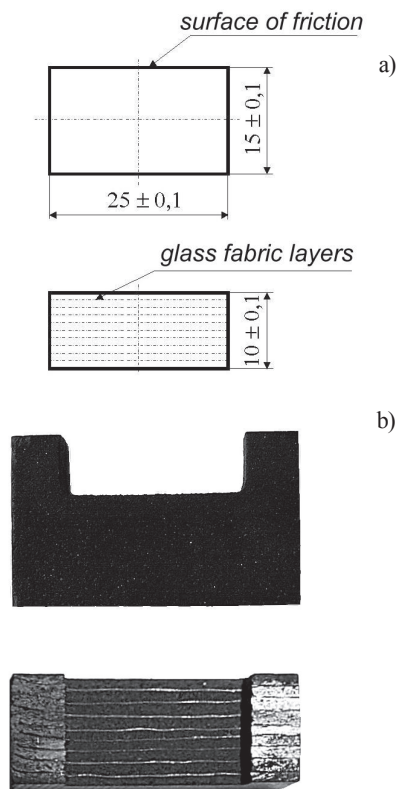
A tested specimen [9, 22]: a) structural drawing, b) after the test
